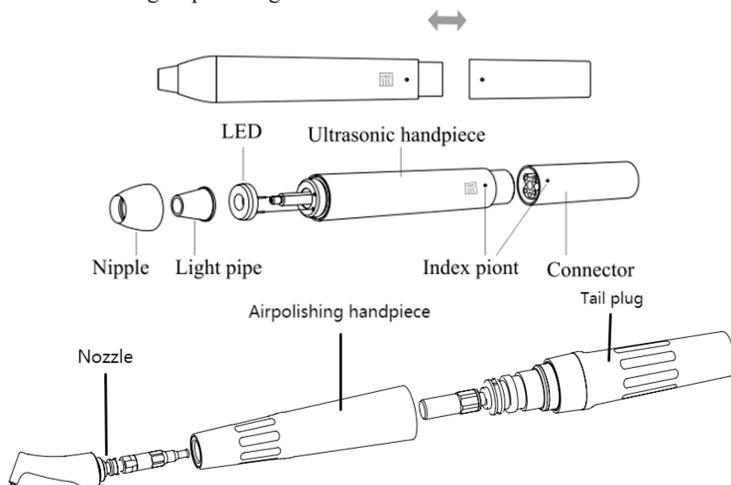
Ultrasonic handpiece and Air polishing handpiece
